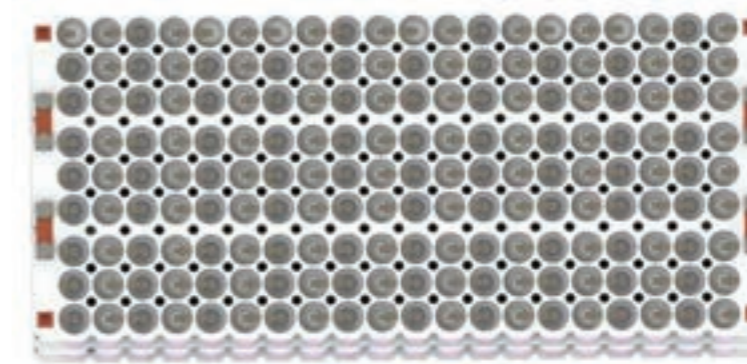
Assembly of Modules with Copper Plate and Bolt Connections
